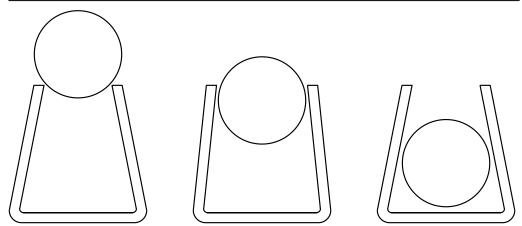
Illustration of how the coil would hold the tube in place as a snap-fit joint.
